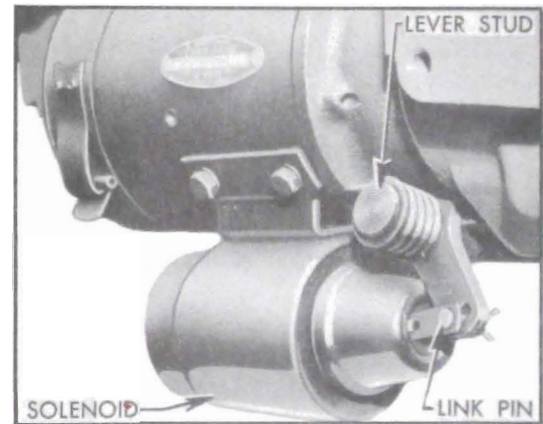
Cranking Motor Shift Linkage—Series 50-70
